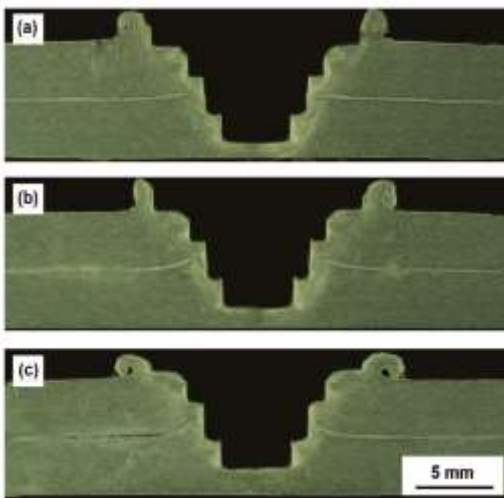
FSSW welded macrostructure by a step pin at RS: (a) 900 rpm, (b) 1400 rpm (c) 1800 rpm
